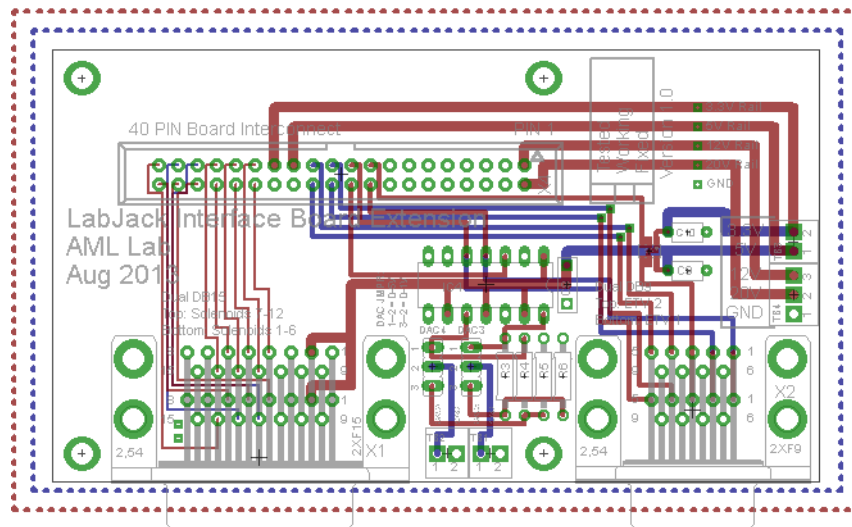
Board layout for the Interface Board Extension circuit. The top layer of the board is in red, while the bottom layer is in blue. Silkscreen is presented in white. Image is actual size.
